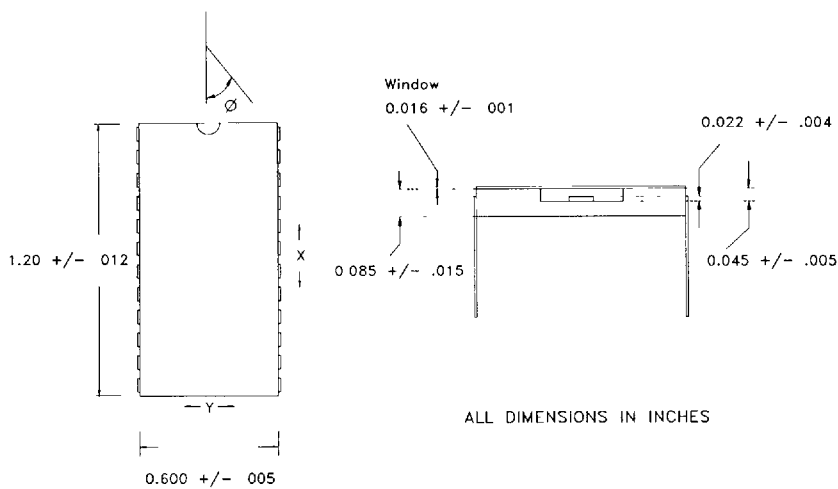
DIMENSIONS OF PACKAGE # 50-01-40003TABLE 2. PACKAGE # 50-01-40003 TYPICAL DIMENSIONS
